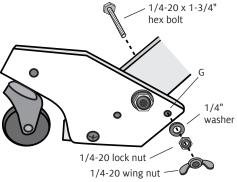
STROLLER BAR AND FRONT CASTER BLOCK
